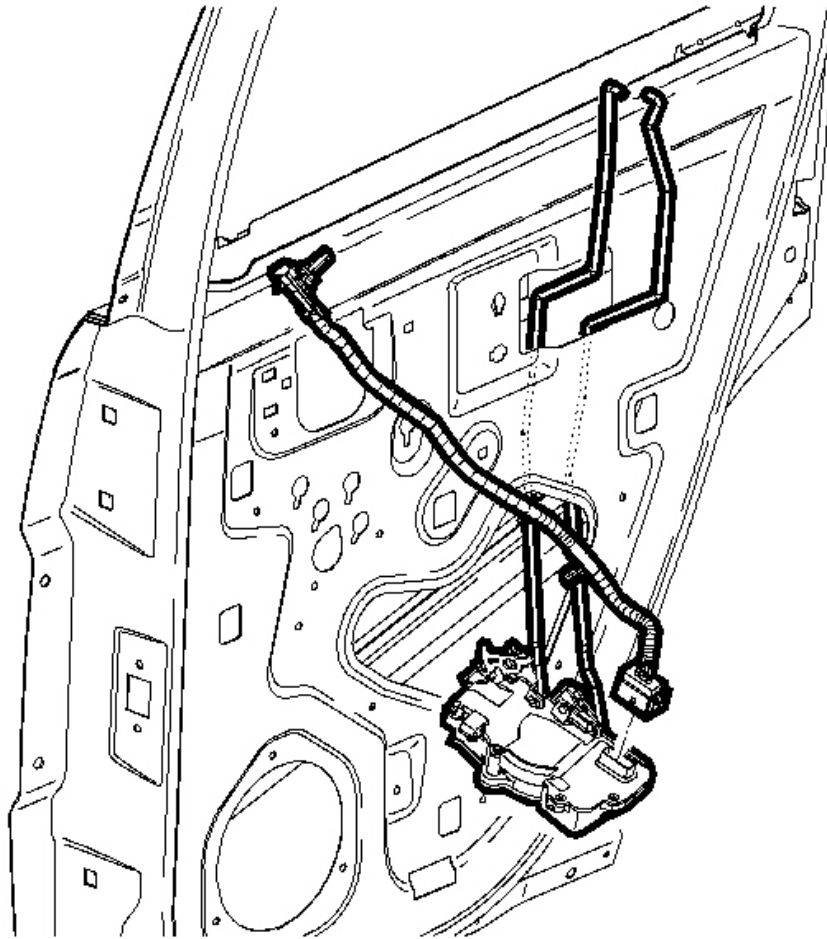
Removing/Installing Rear Door Latch Assembly With The Inside Handle
